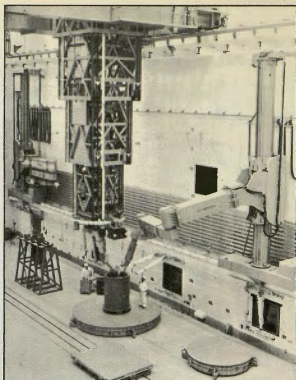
MAINTENANCE ASSEMBLY/DISASSEMBLY AREA
